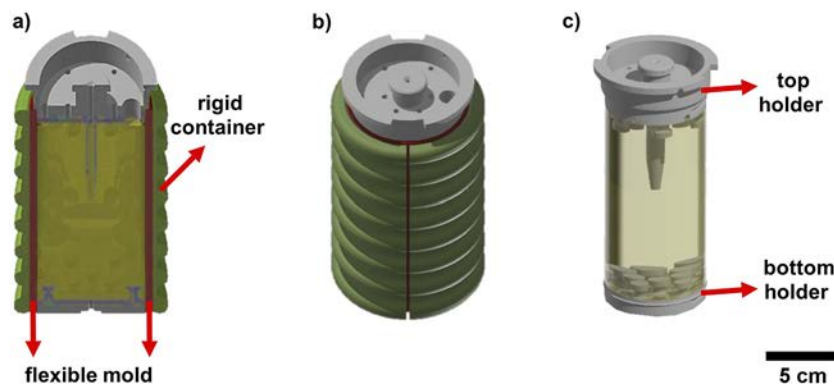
Molding process: (a) Cross-sectional view of the mold filled with liquid gel. A flexible vessel, housed within a rigid container, is employed to maintain the sample's cylindrical shape during solidification. (b) Assembled mold for sample preparation. The molten gel is introduced through the openings at the top of the mold. (c) Sample post-demolding. The gel's exterior surface remains unconfined (free surface).
